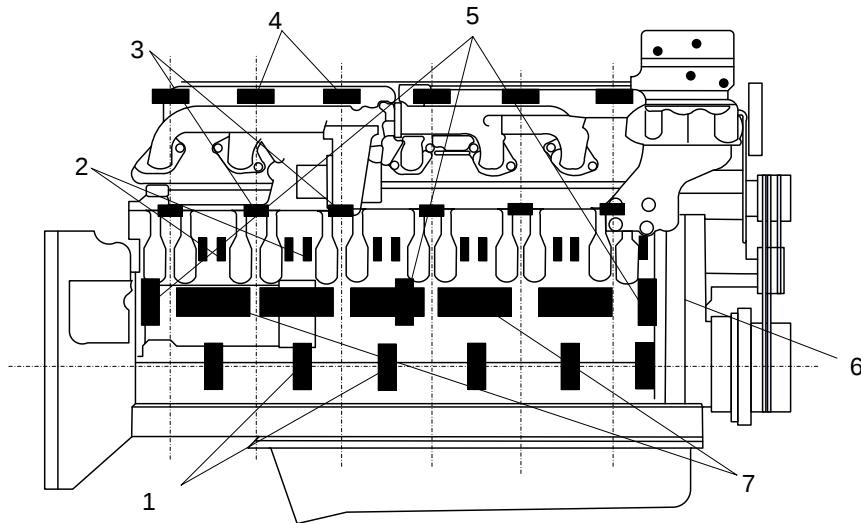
Signal listening locations in engine connections: 1 – crankshaft – root bearing; 2 – connecting rod – bushing; 3 – valve – piston bottom; 4 – rocker arms – valve stem; 5 – camshaft – bearing; 6 – distribution gears; 7 – camshaft cam – pusher.
